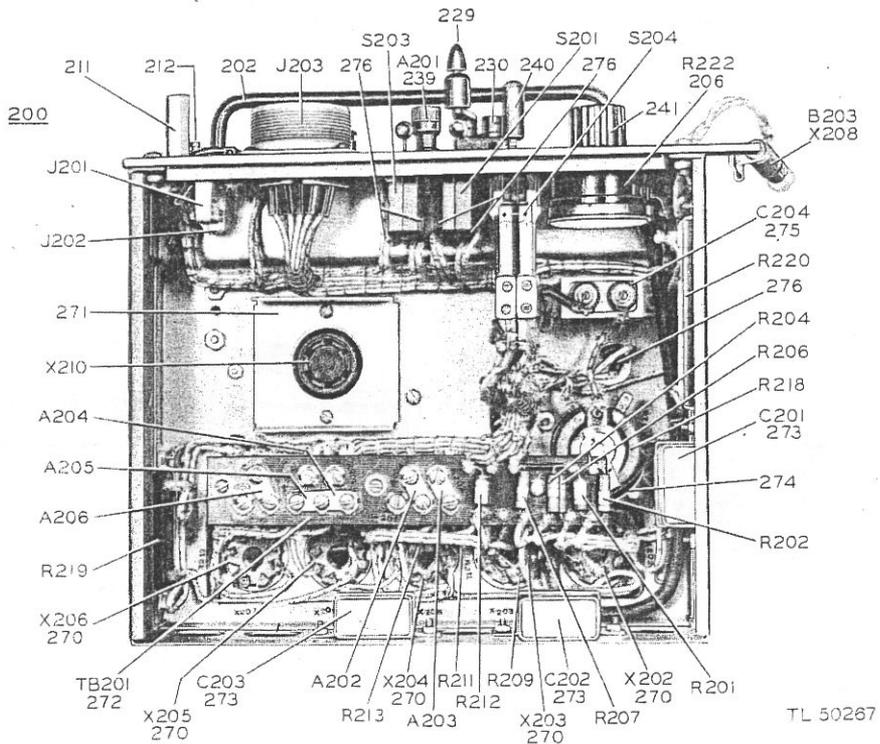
Recorder-Scanner BC-918-B, removed from case (sub-chassis view, vibrator removed)
